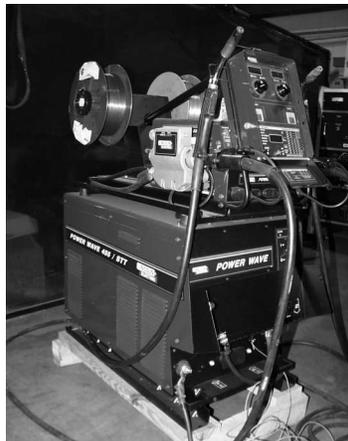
Lincoln Power Wave 455/STT Equipment
